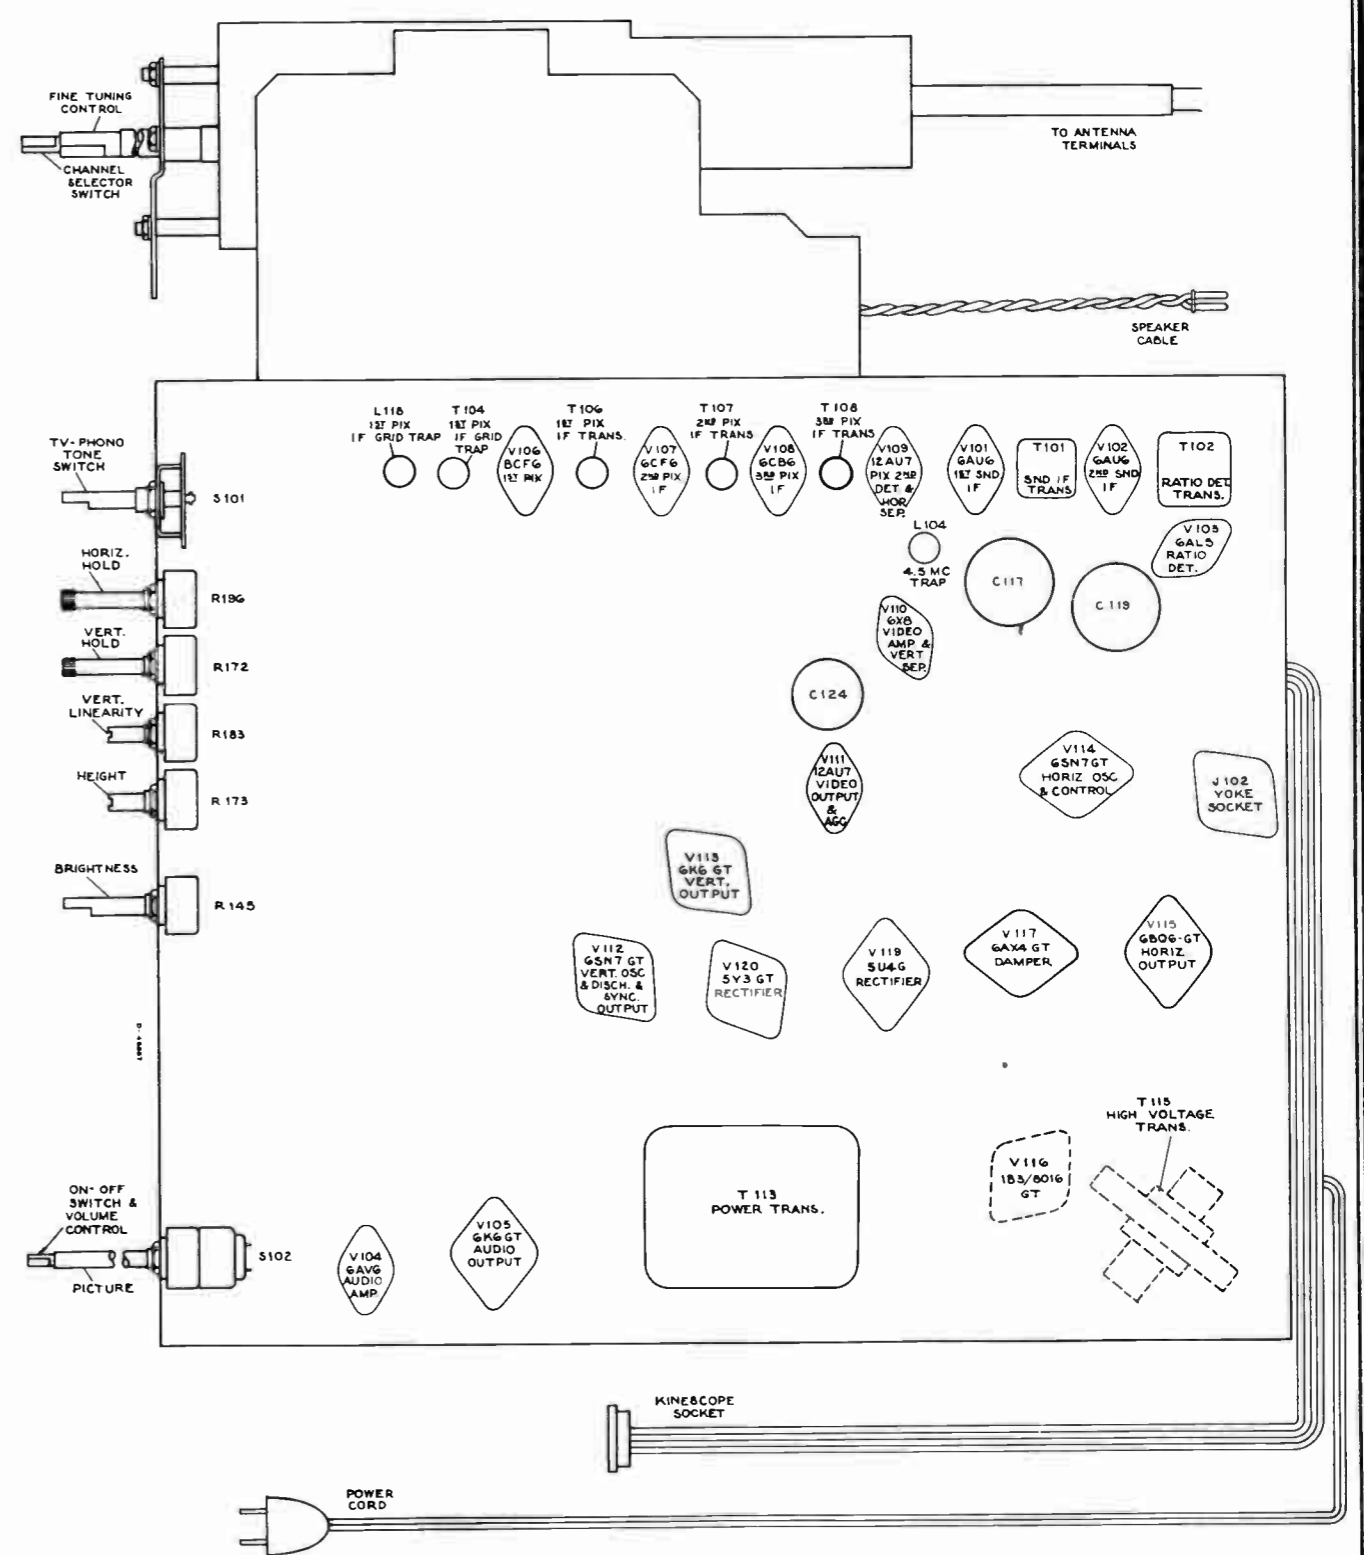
Chassis Bottom View (shown with KRK29 Tuner)
